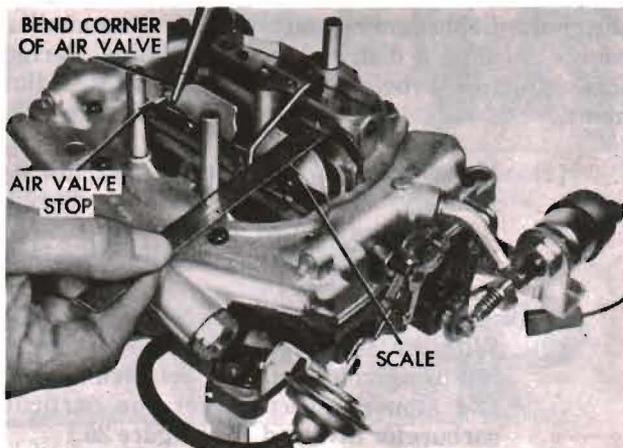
Adjusting Secondary Air Valve Opening—Slide 2188
